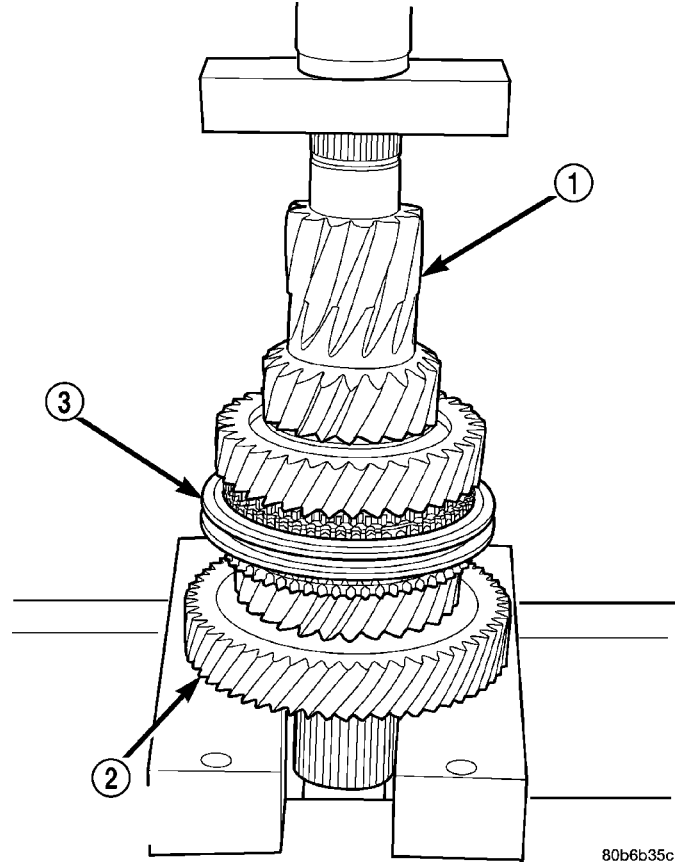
FOURTH COUNTERSHAFT ONTO SIXTH COUNTERSHAFT GEAR
